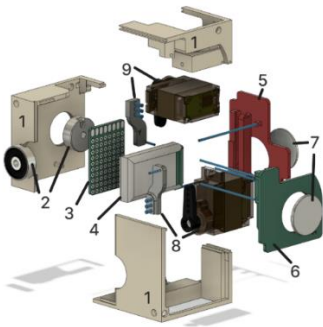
Exploded view of the cubic robot module. 1 — resin structural body, 2 — electromagnets, 3 — custom PCB, 4 — lithium battery, 5 — Y-axis face panel, 6 — X-axis face panel, 7 — mild steel discs (electromagnet targets), 8 — X-axis servo assembly (motor and S-arm), 9 — Y-axis servo assembly (motor and S-arm).
